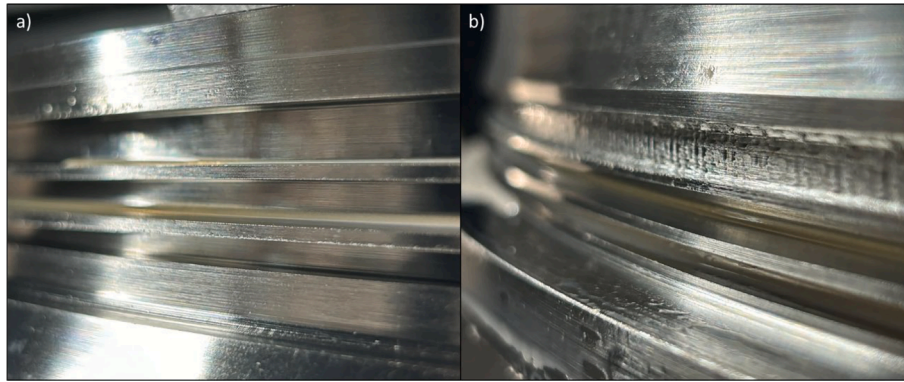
Good cutting edge preparation that led to optimal finishing (a) and excessive rounding that led to tool breakage (b) in the machining of Inconel® 718.
